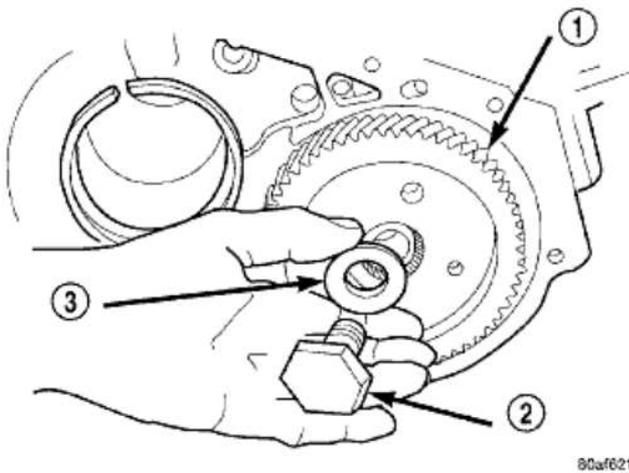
Removing/Installing Output Gear Bolt & Washer
